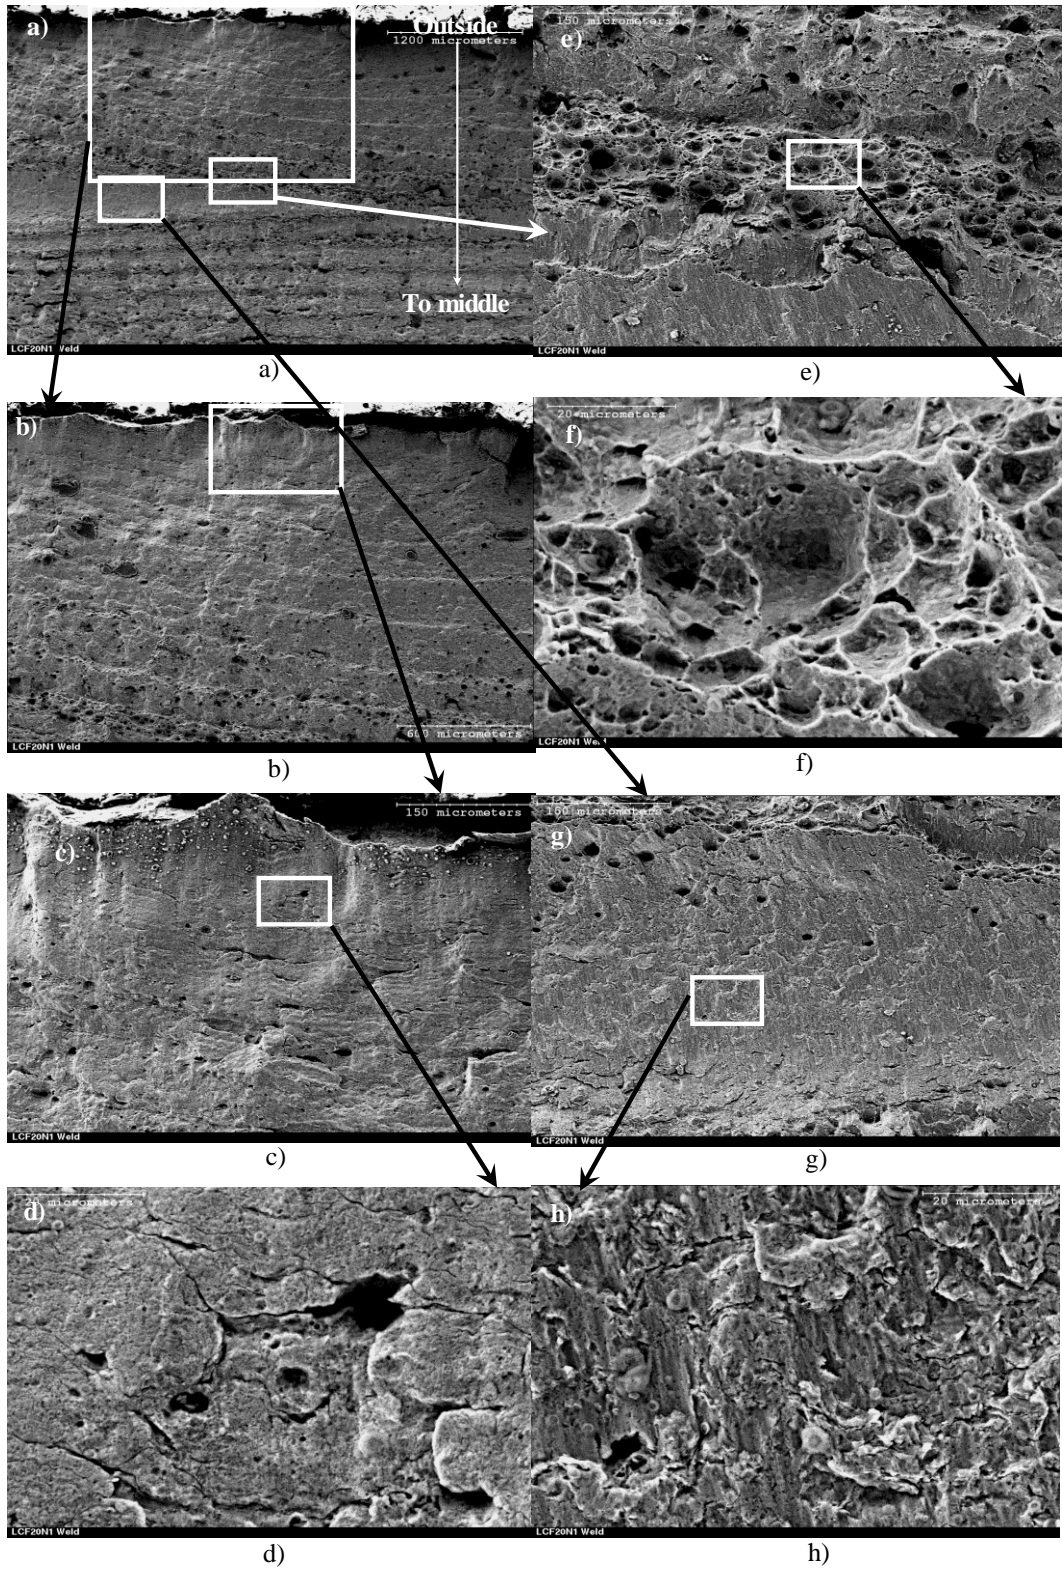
SEM of fracture surface of outside portion of seam weld (specimen LCF20N1)
